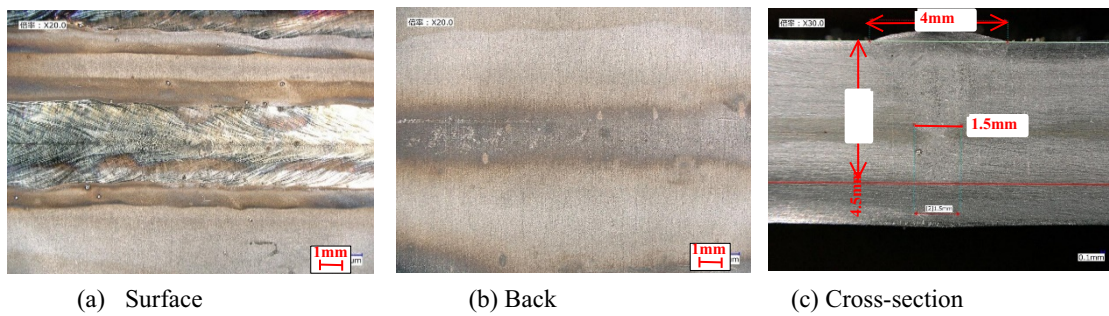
Photograph after laser welding\_\_Test No. II.
